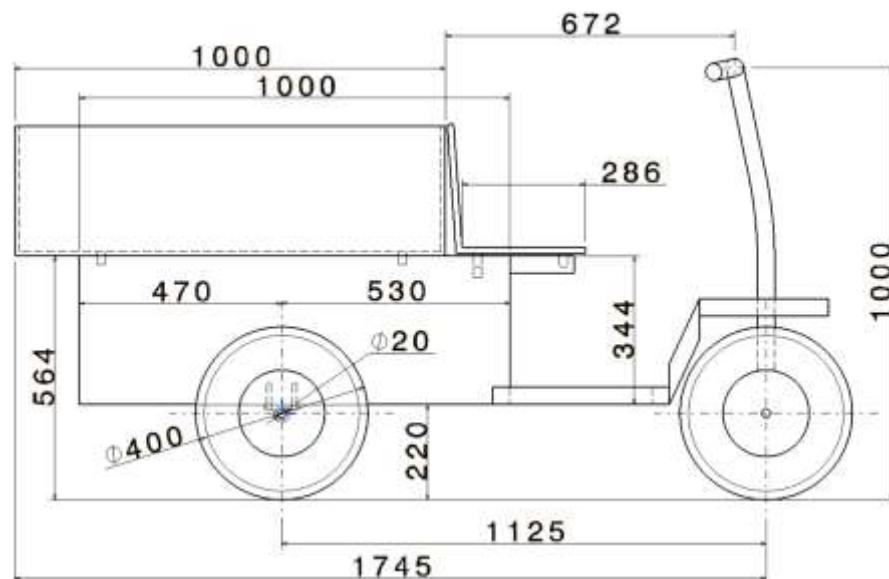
2D Drawing of Rough 3D CAD Model of EUV
